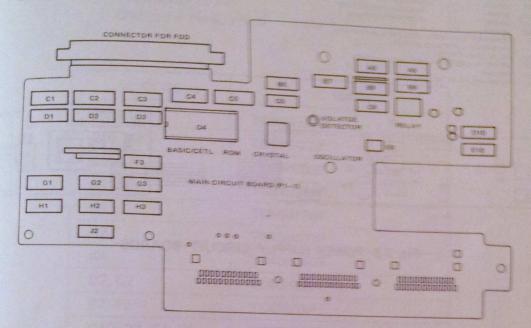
MAIN P.C.B. FROM PARTS-LOCATED SIDE
